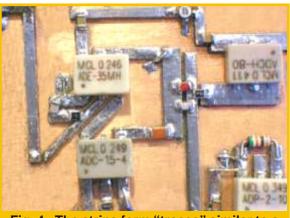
The strips form "traces" similar to a PCB for orderly mounting of the SM components. Often, diagonal runs will be more convenient, as shown here.
